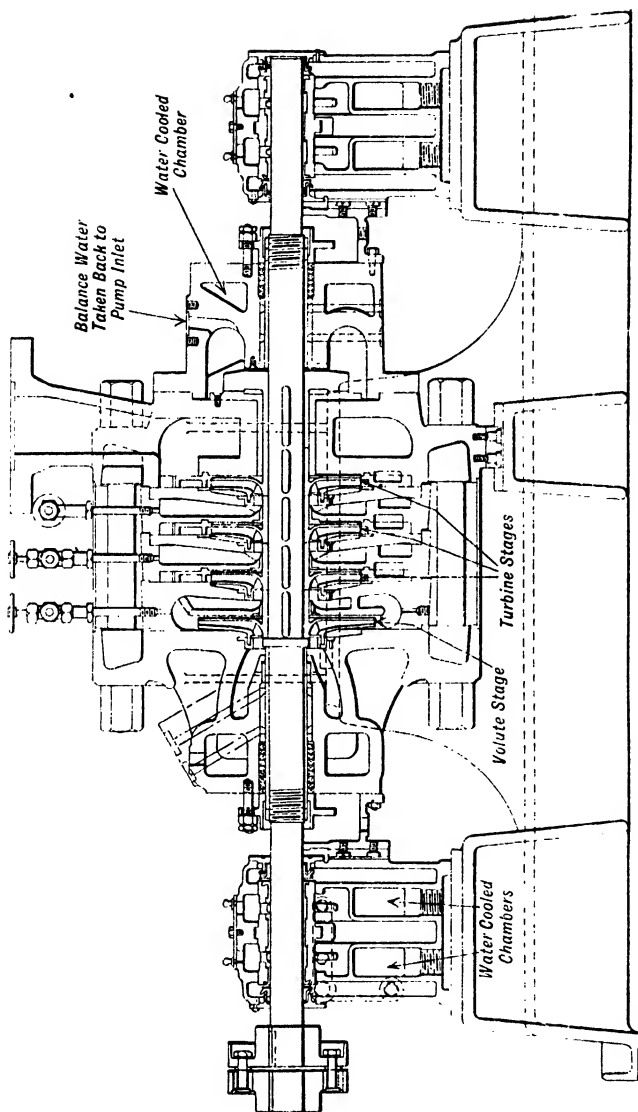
Section of 4-stage boiler-feed pump (Bradford).
